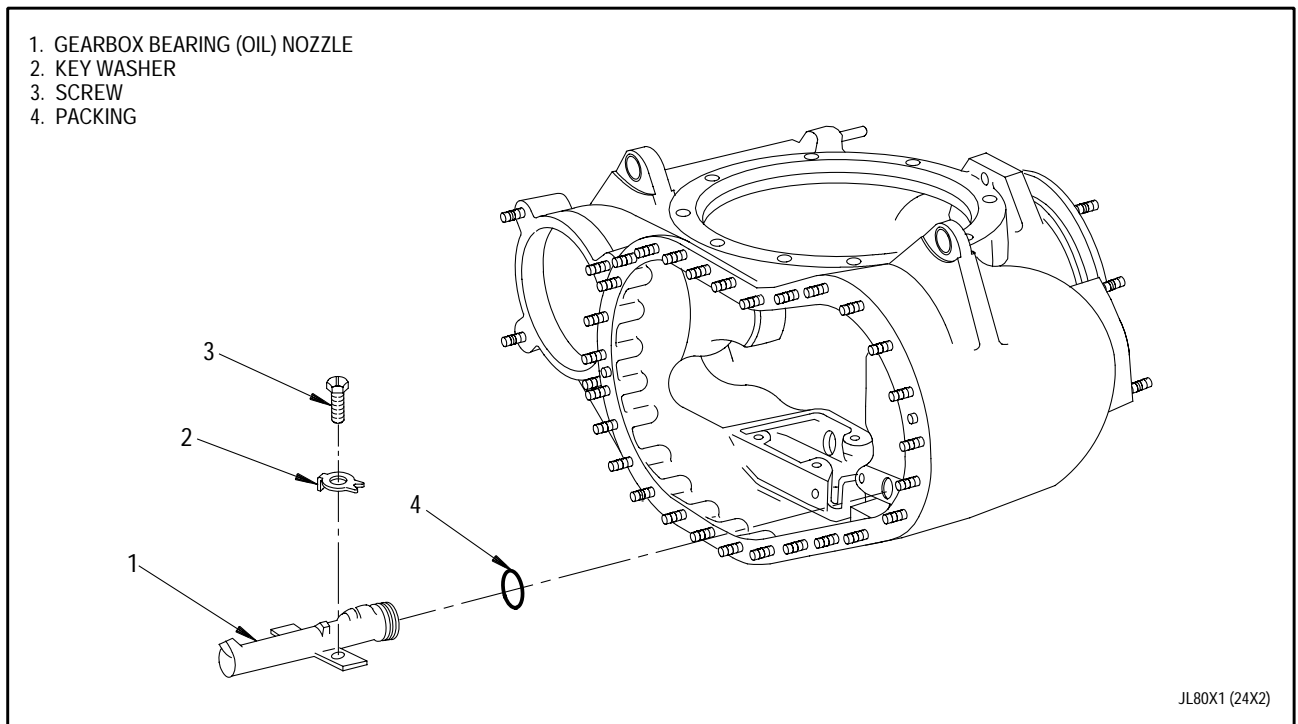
Gearbox Bearing (Oil) Nozzle - Removal
